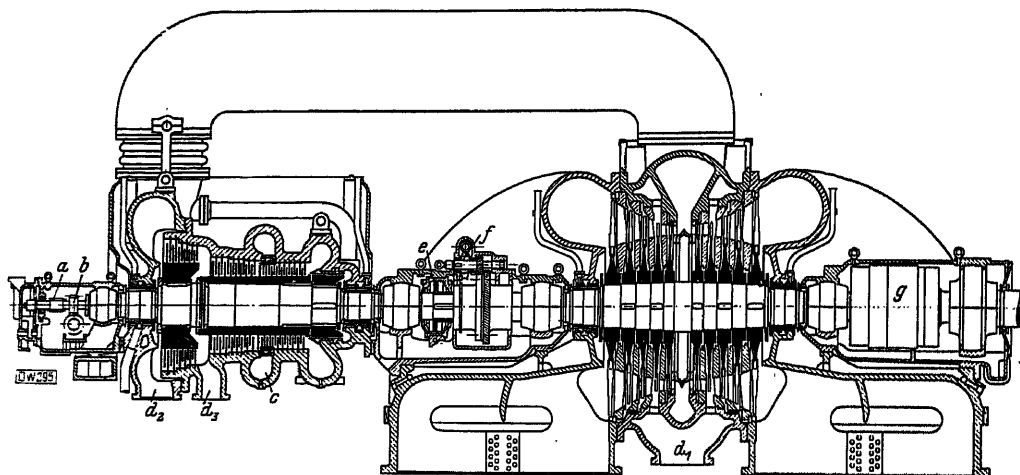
Brit. G.E.C.*, 30,000 kw., 3000 R.P.M., two-casing high-pressure turbine
